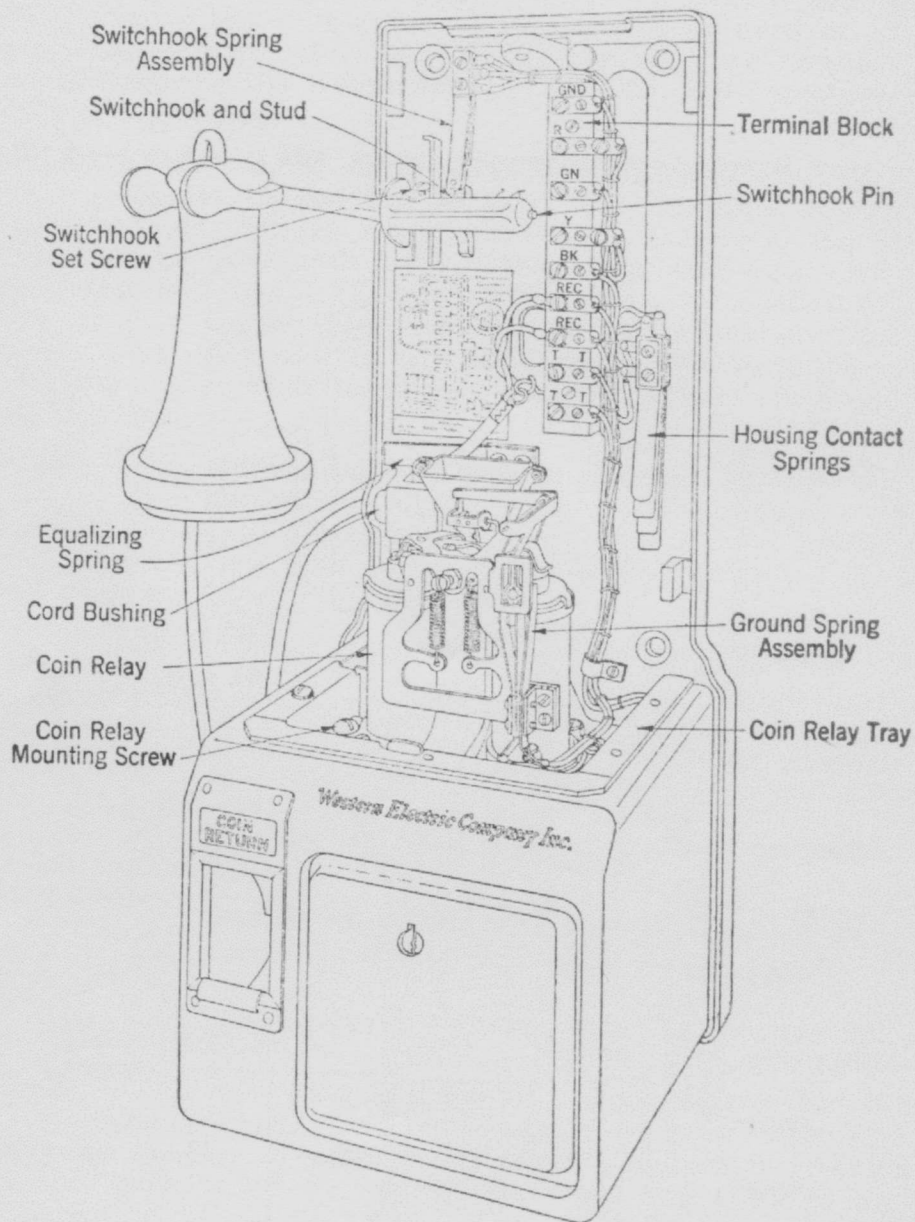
Earlier Type Coin Collector—Backplate and Lower Housing
